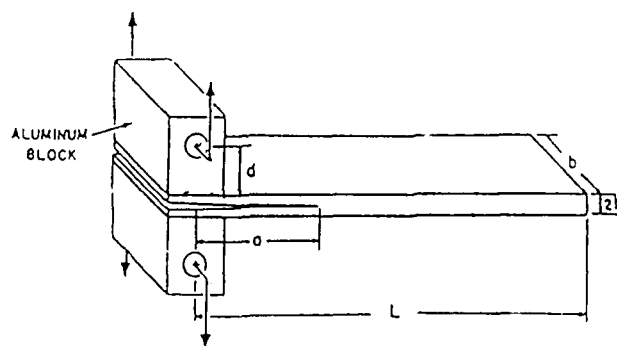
DCB specimen for the fatigue testing of welded polystyrene plates with $b = 12.7$ mm, $d = 12.7$ mm and $2h = 6.6$ mm. (Yuan and Wool).
